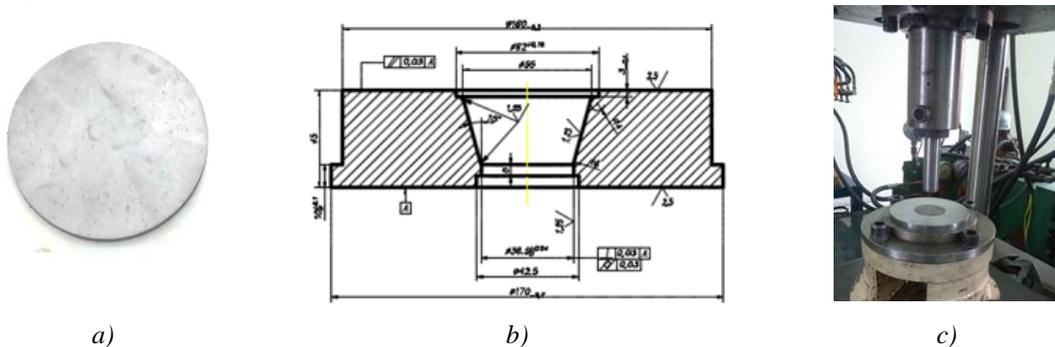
The blank (a), die (b), the tools when mounting on hydraulic presses YH32-100T (c).
